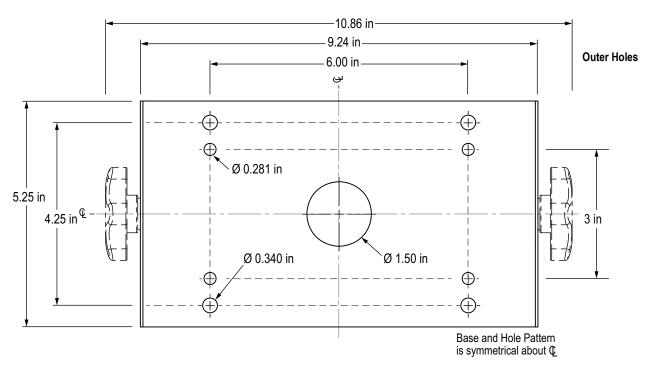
Universal Tilt Stand Hole Pattern Dimensions
